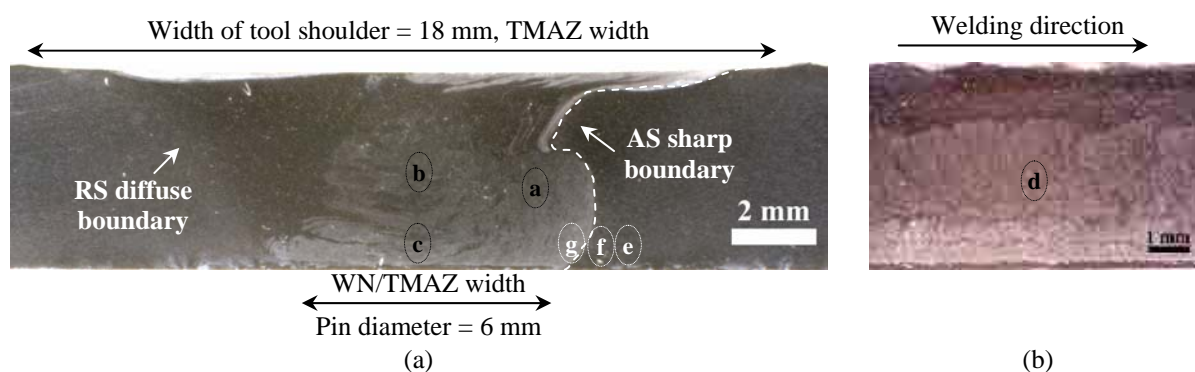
Macrographs for the 5083-H116 weld etched in 10% H_3PO_4 solution showing (a) full weld micrograph, (b) longitudinal section along the weld centreline
